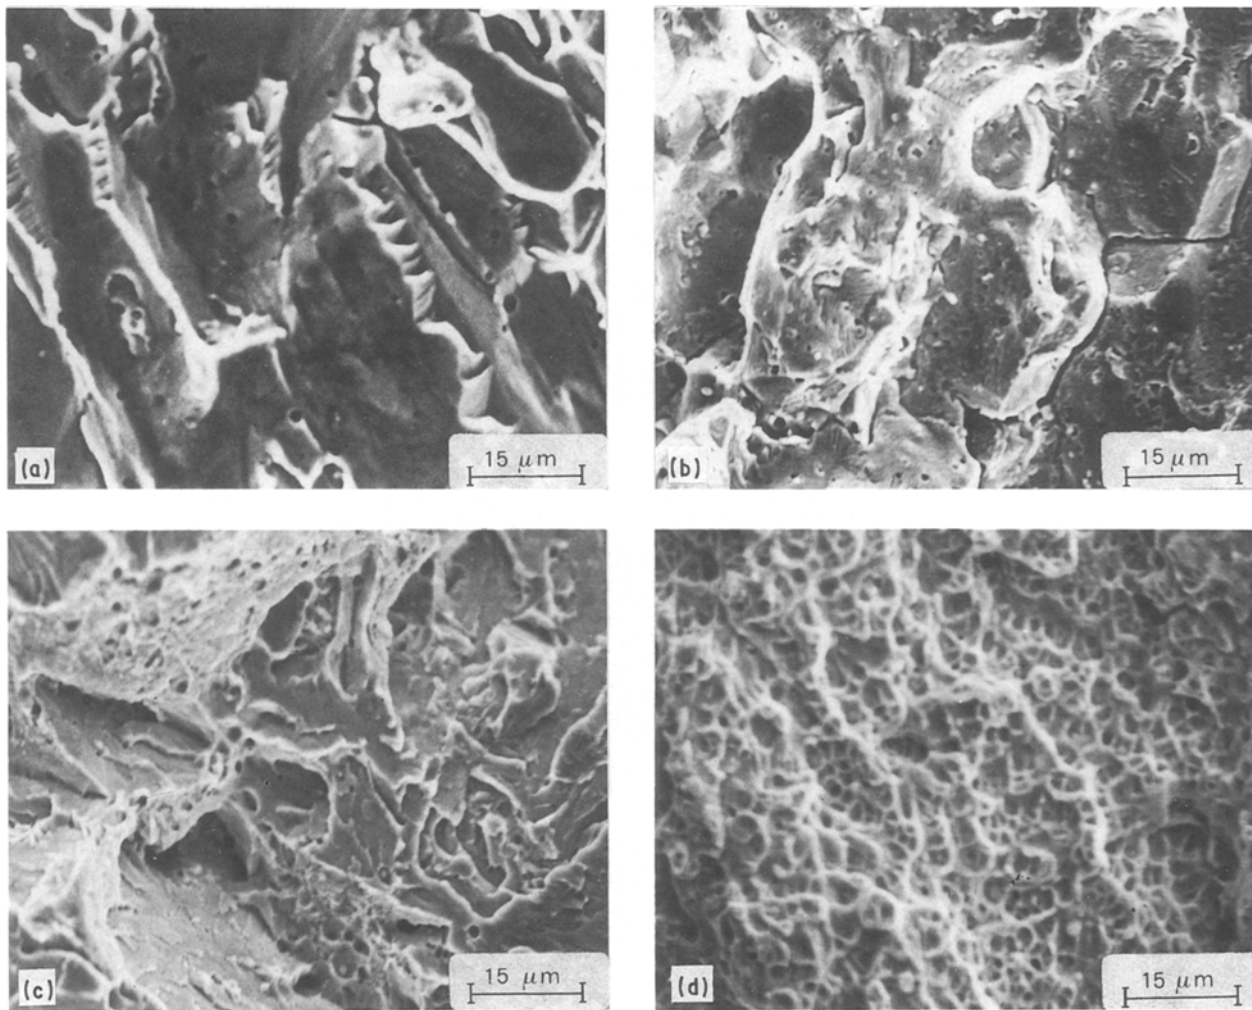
Fractographs of impact fracture surfaces of deposits postheated at 350°C: (a) deposit 18, (b) deposit 13, (c) deposit 7, (d) deposit 14.
